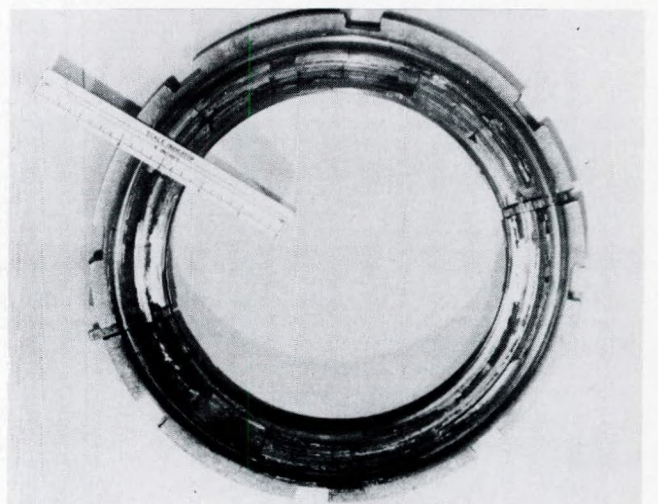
Chaudiere primary pinion ahead thrust ring damage
